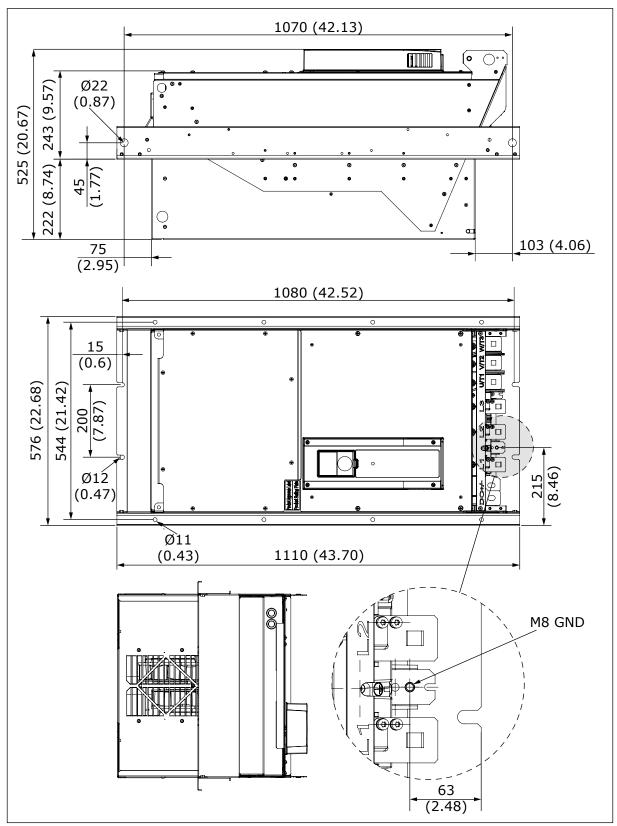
The dimensions of the AC drive, flange mounting, MR10 [mm (in)]
